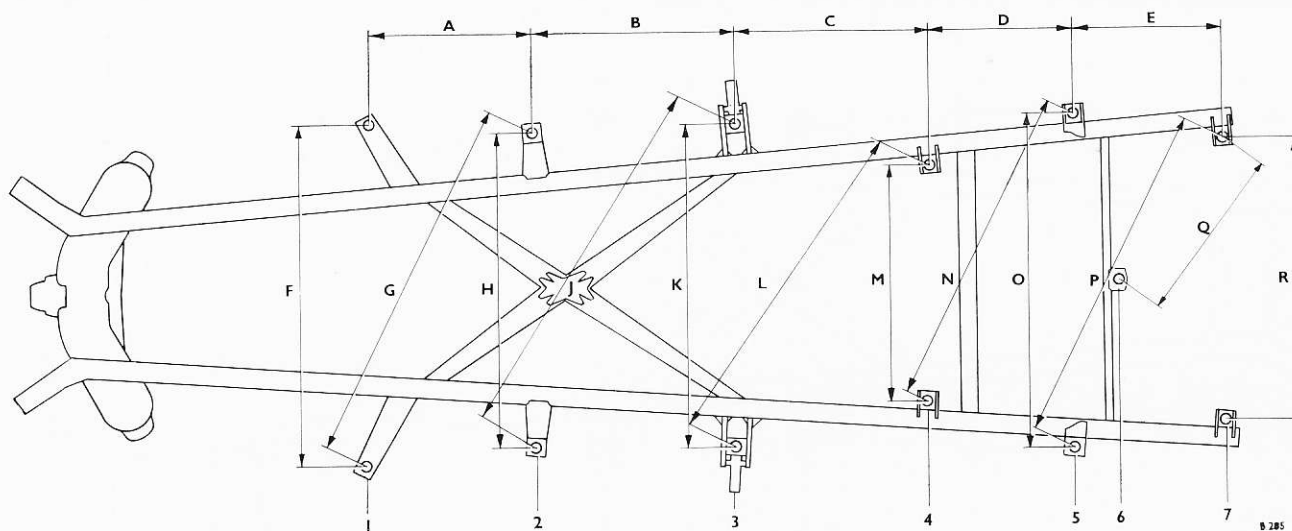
Chassis frame and body checking dimensions S1 Long Wheelbase cars
